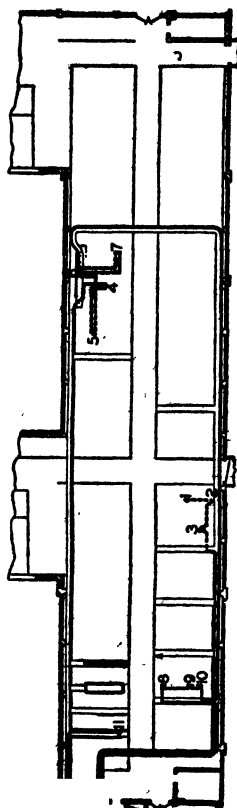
Original Layout for Manufacture of a Shaft, on Four Floors of Plant
